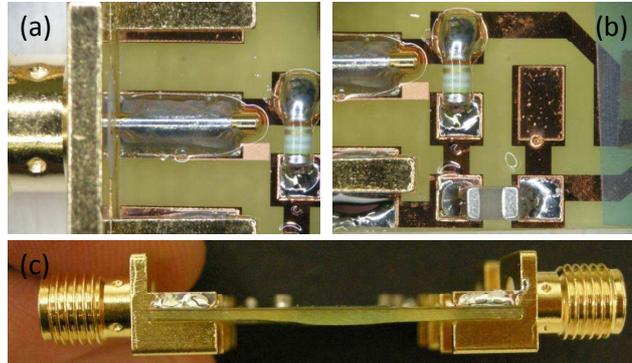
Soldering of the SMD and SMA components onto the opened contact pads (a & b) and a side view on the thinned substrate (c).
